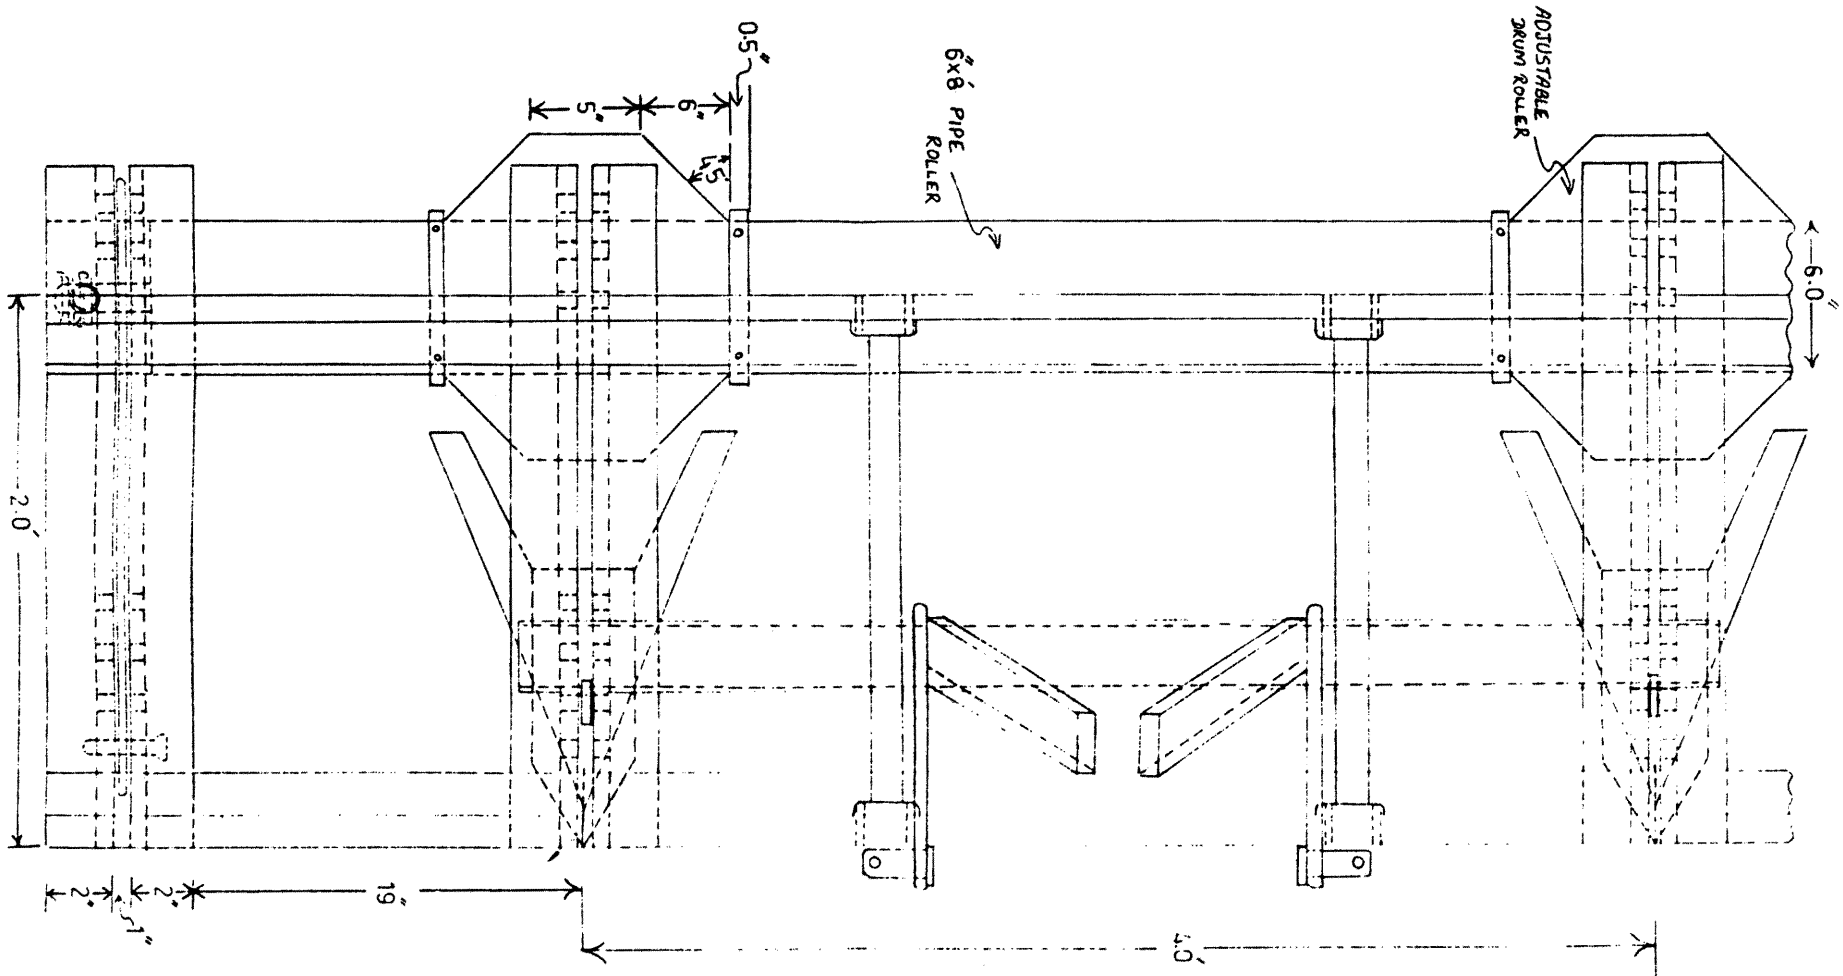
Plan view of bedshaper showing frame, furrow openers, and roller assembly.
